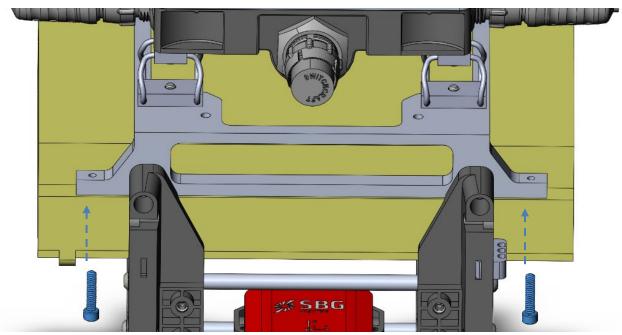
SkyRaider Primary Mount - Payload Installation
